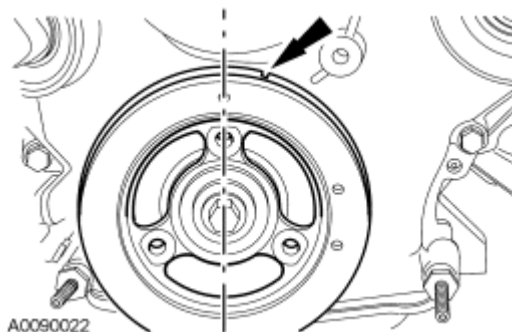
Locating Crankshaft Damper Spoke Timing Mark
